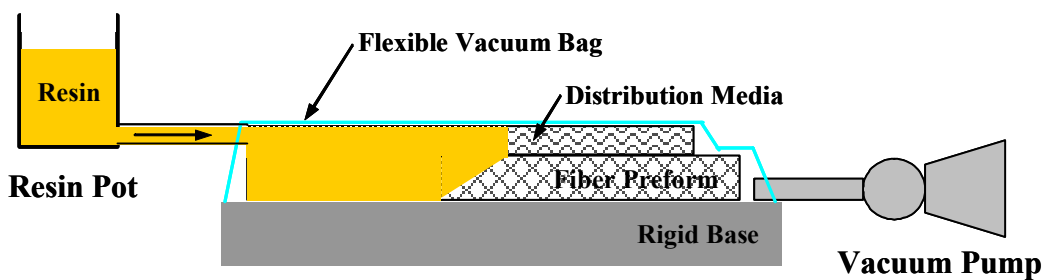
Vacuum Assisted Resin Transfer Molding (VARTM).
